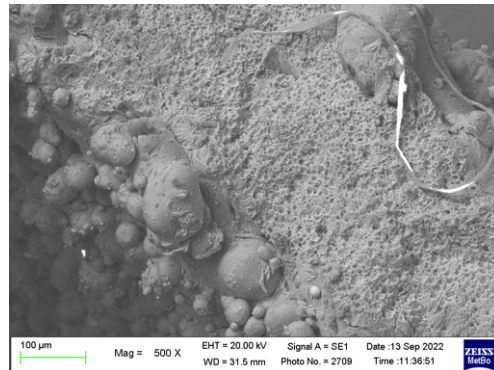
Final fracture surface of a 0.6 mm thick specimen T6 treated.
